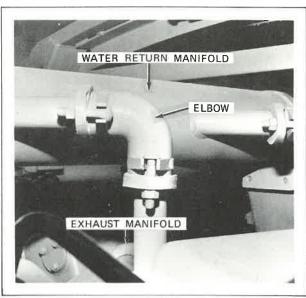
ENGINE COOLING-WATER RETURN MANIFOLD.
